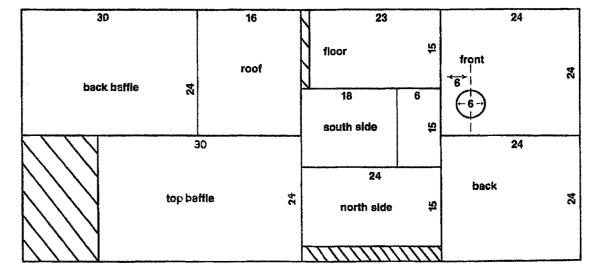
Cutting plan for 1/2-inch CDX plywood sheet (dimensions in inches).
